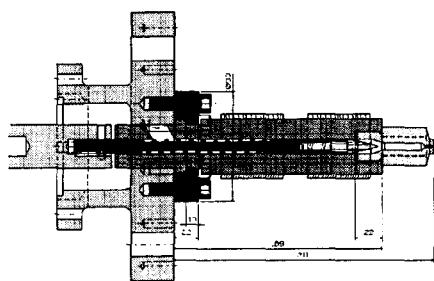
Assembly drawing of injection unit for micro injection molding machine
